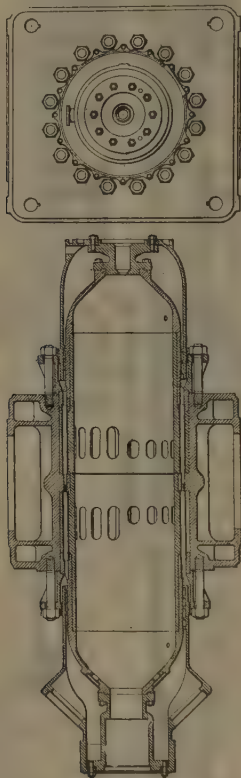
WORTHINGTON STEEL JOINTLESS CYLINDER AND HEAD
